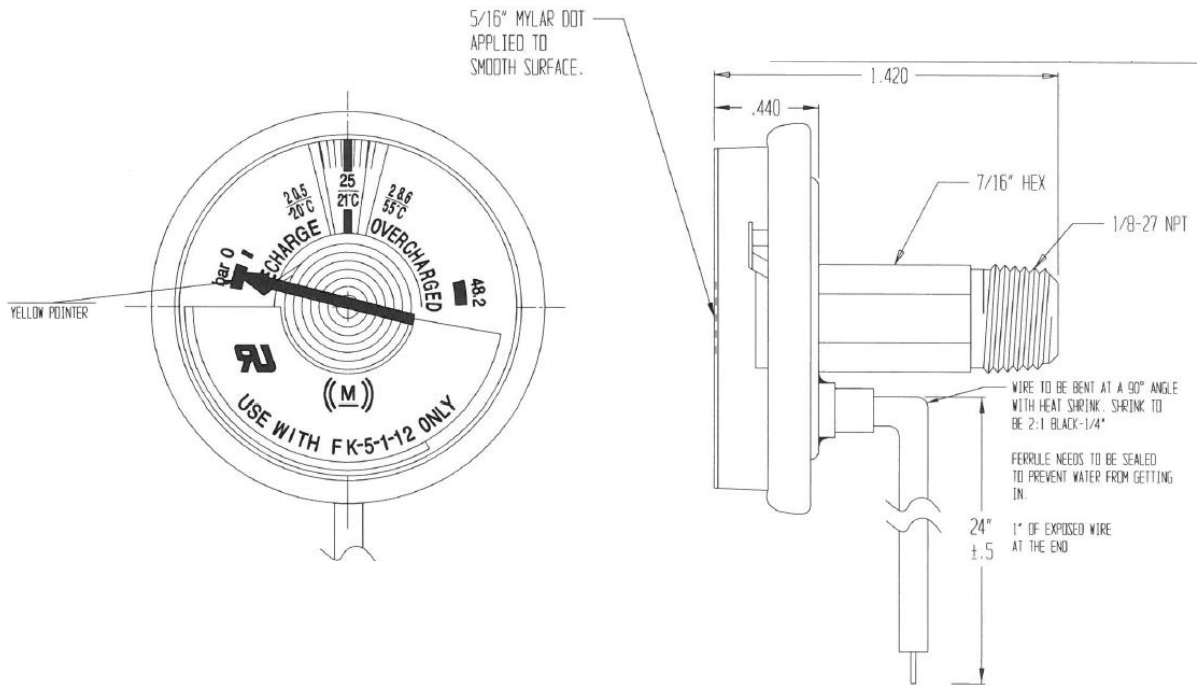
25 bar Pressure Gauge with Low Pressure Switch
